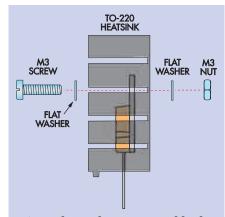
here's how to assemble the regulators to their heatsinks. The 7805 regulator (REG4) presents a special case; its screw should be inserted from the opposite side to that shown so that the screw head isn't obscured by REG3's heatsink.
